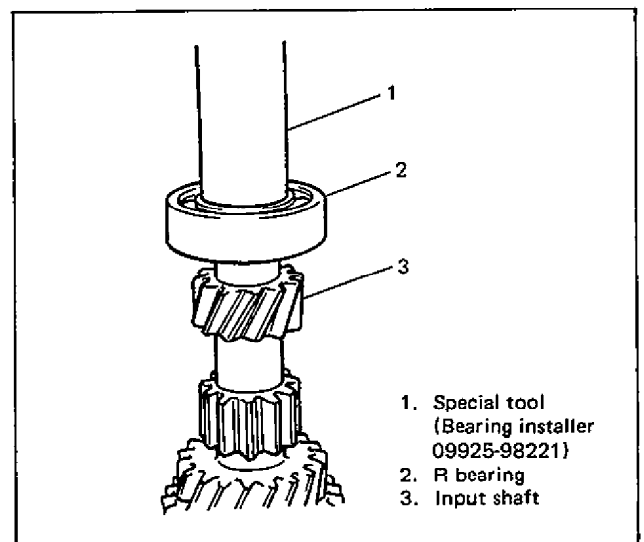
A-52 Press-fitting Input Shaft R Bearing
